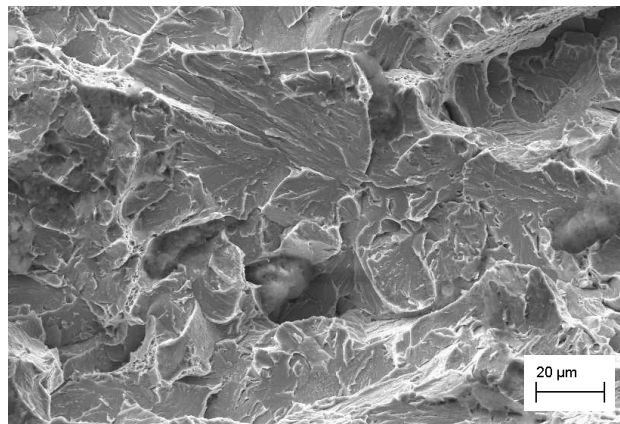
Mixed fracture surface with a large share of cleavage fracture showing the typical planar structure.
